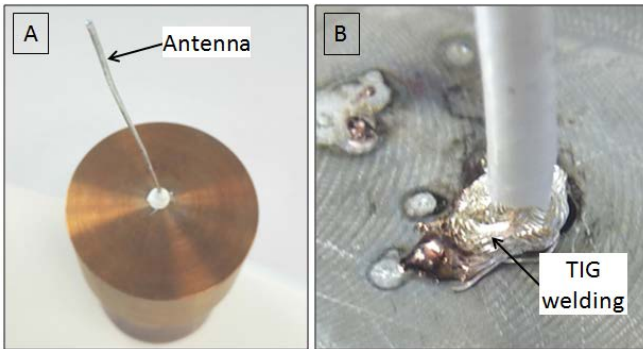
A) Antenna standing out from the cover of the metallic packaging. B) Detail of the antenna ground connection on the inner side of the cover by TIG welding
